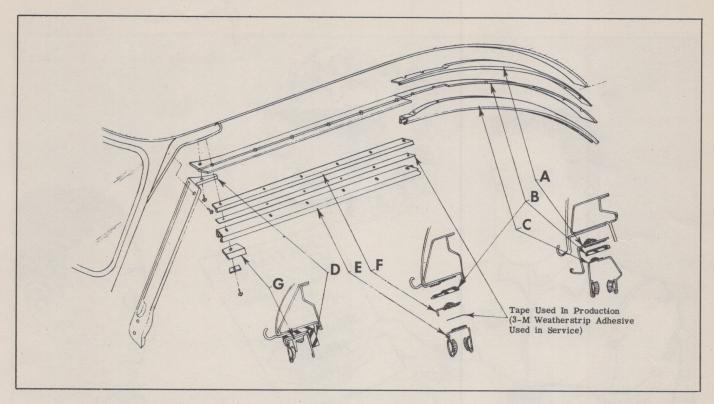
Exploded View of 1952 Catalina Side Roof Rail Sealing Strip
